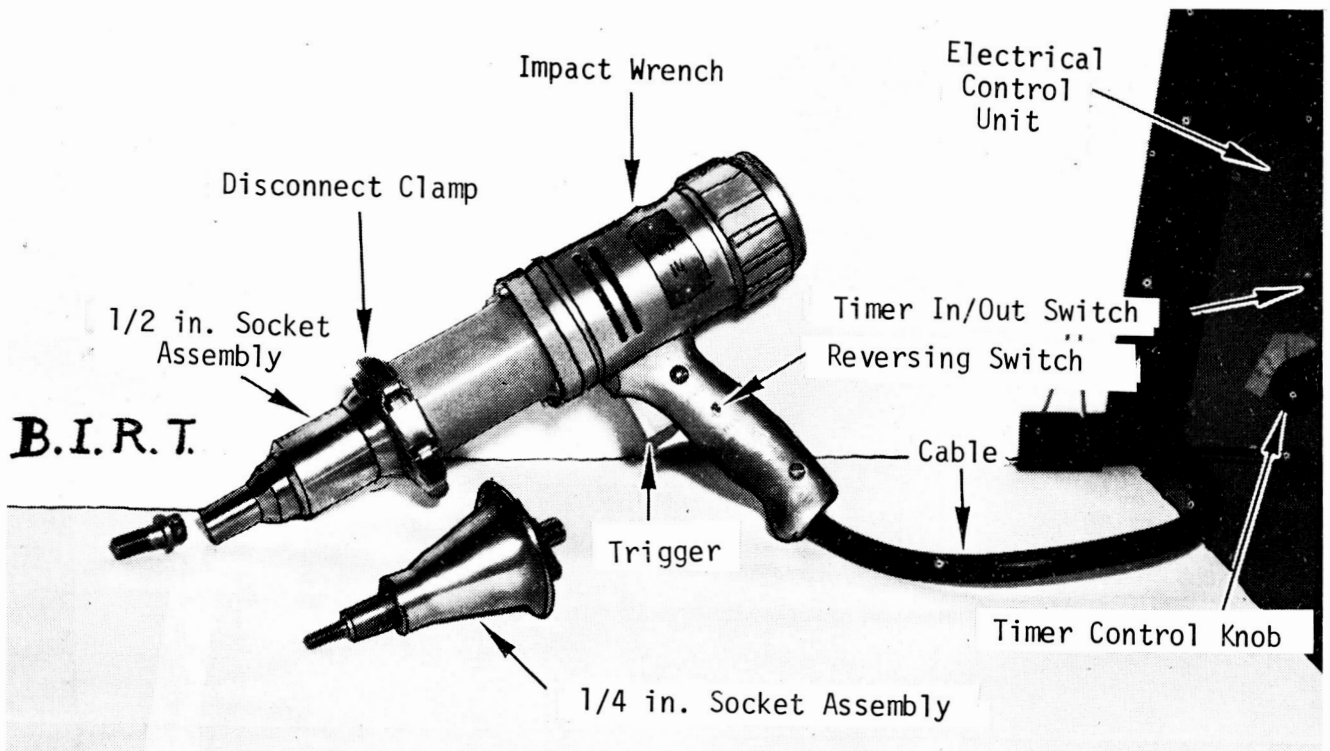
Bolt Installation and Removal Tool (BIRT)
